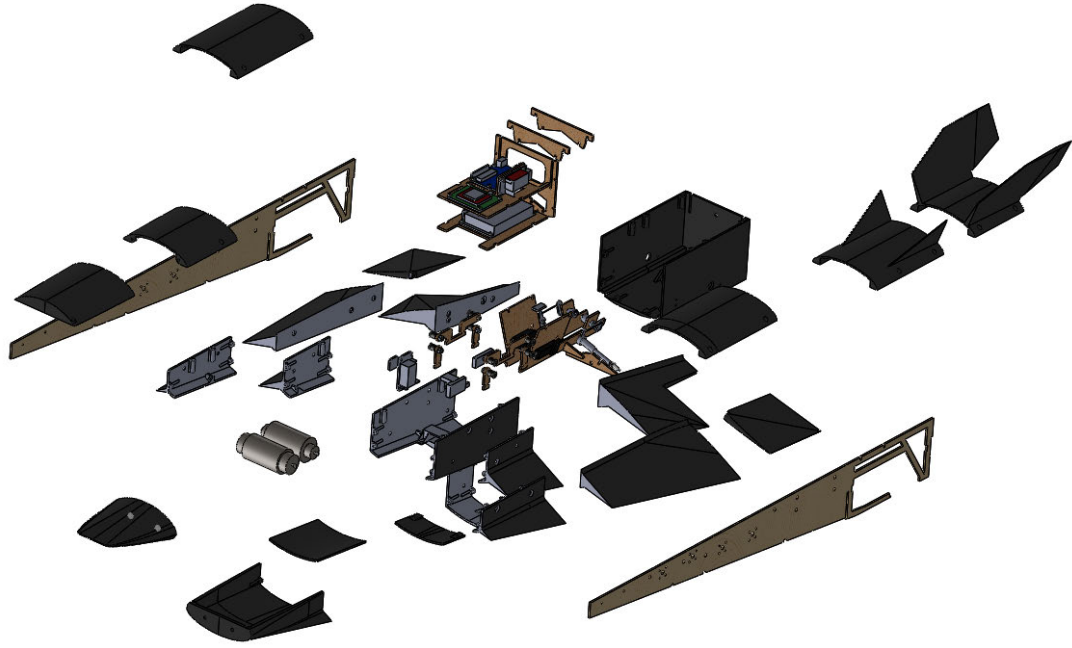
Exploded view of complete CAD model (fasteners hidden for clarity)
